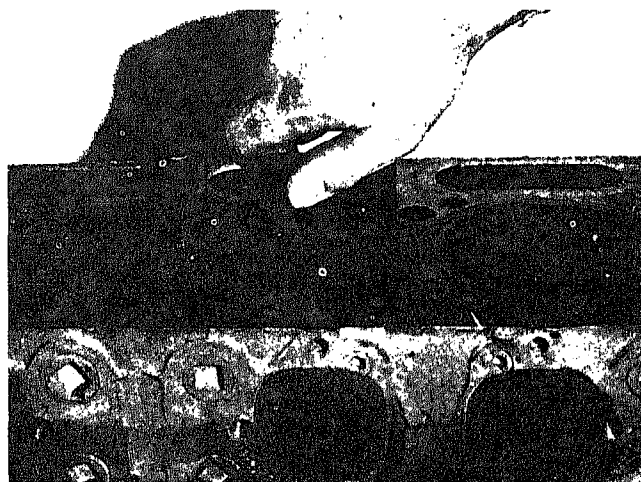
Inserting hold-down knob into holder assembly
